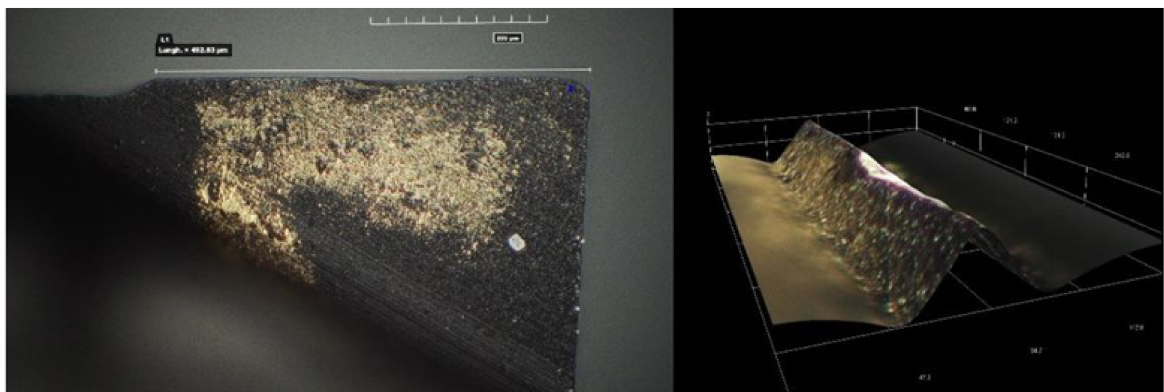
An example of tool damage, (a) a 2D image and a (b) 3D picture.
